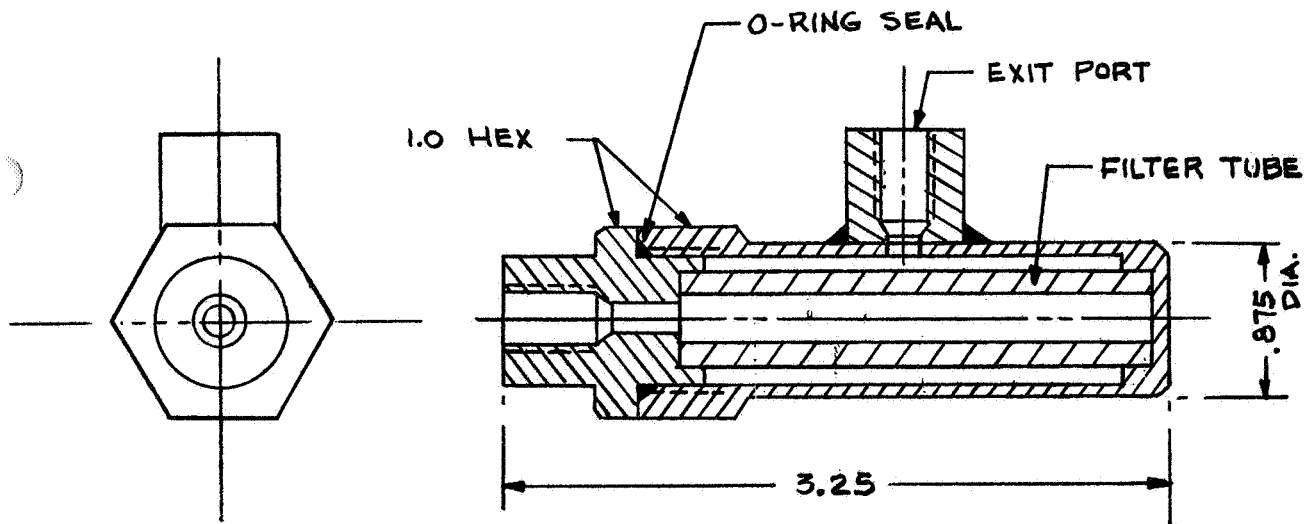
FILTER ASSEMBLY CONSTRUCTION DETAILS (NOT TO SCALE, MOUNTING BRACKET NOT SHOWN)
